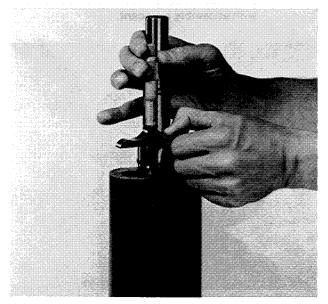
B MEASURING FROM END OF BEARING SPACER TO END OF ROTOR LOBE
